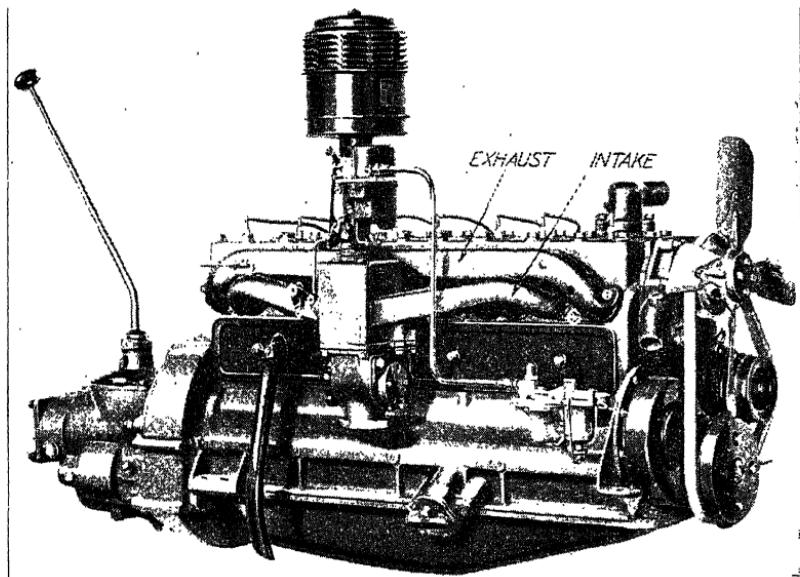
Pontiac Engine Manifold System, Showing Intake and Exhaust
